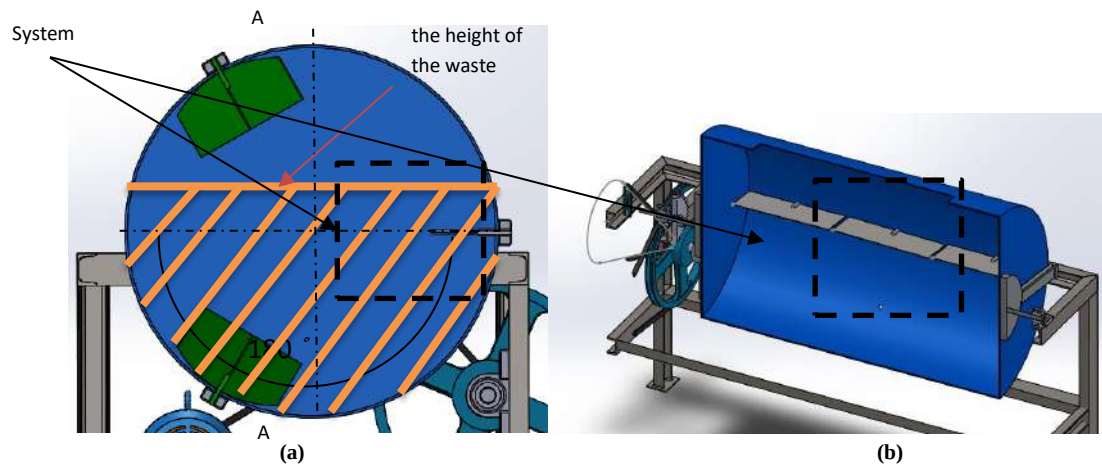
horizontal agitator at position 180° (a) front view (b) side view with A-A
